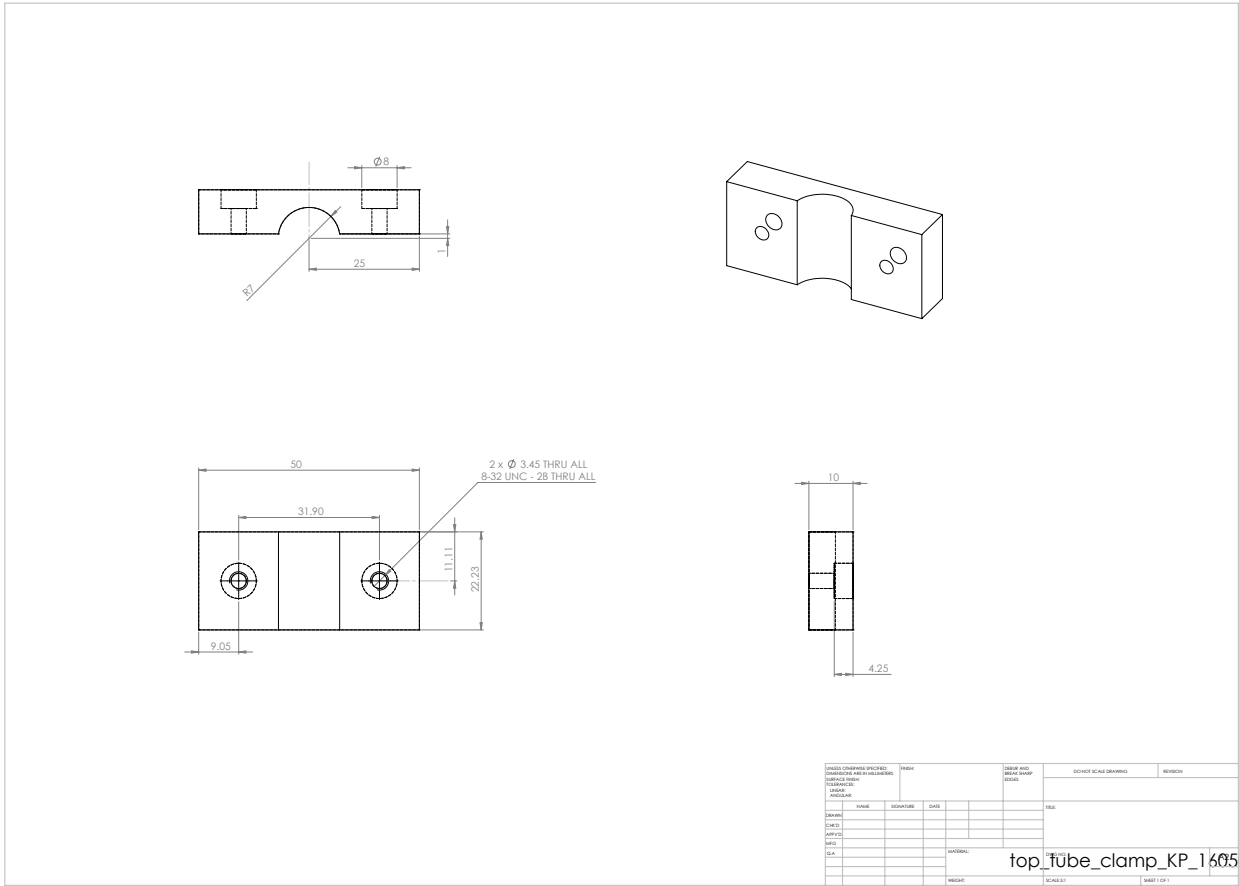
Drawing for flange support that attaches to part shown in Fig. A1.
